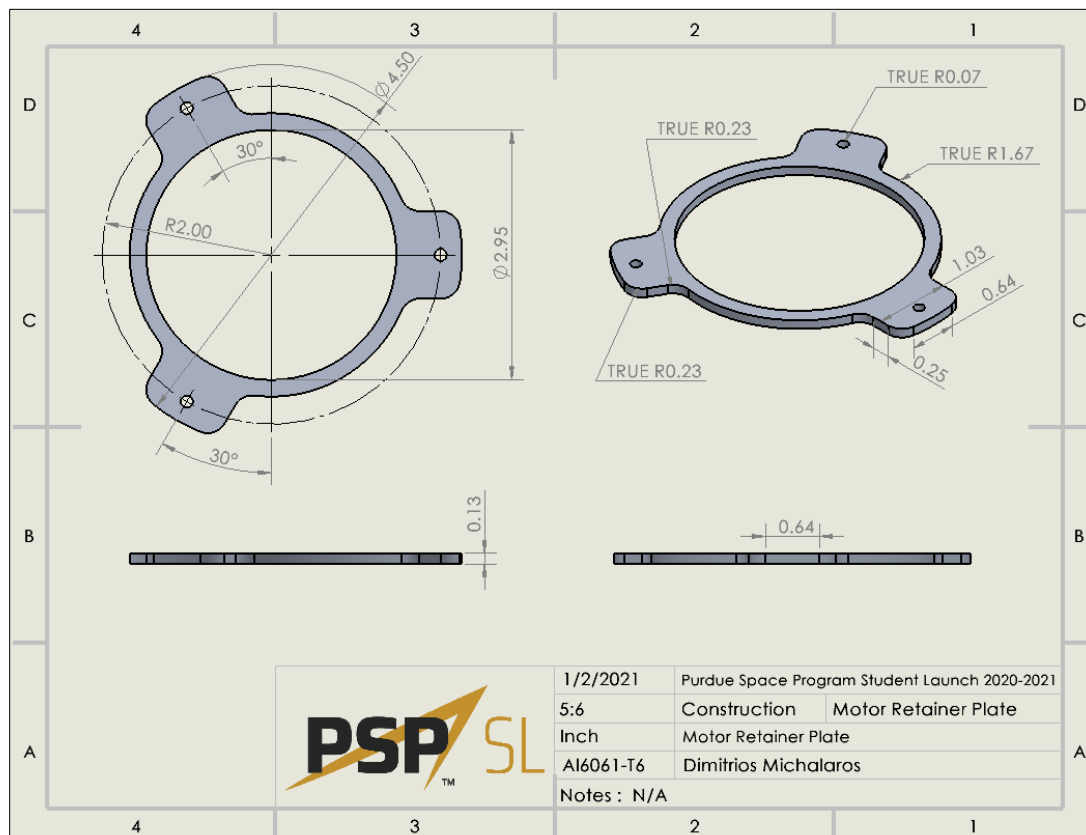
Motor Retainer Plate Dimensional Drawing
